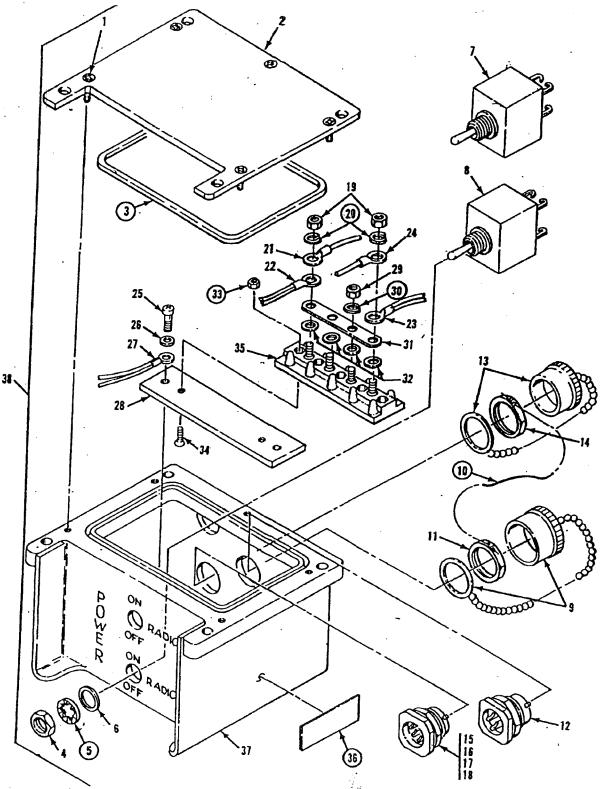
Power Control Unit  $-\frac{1}{2}$ Disassembly.
